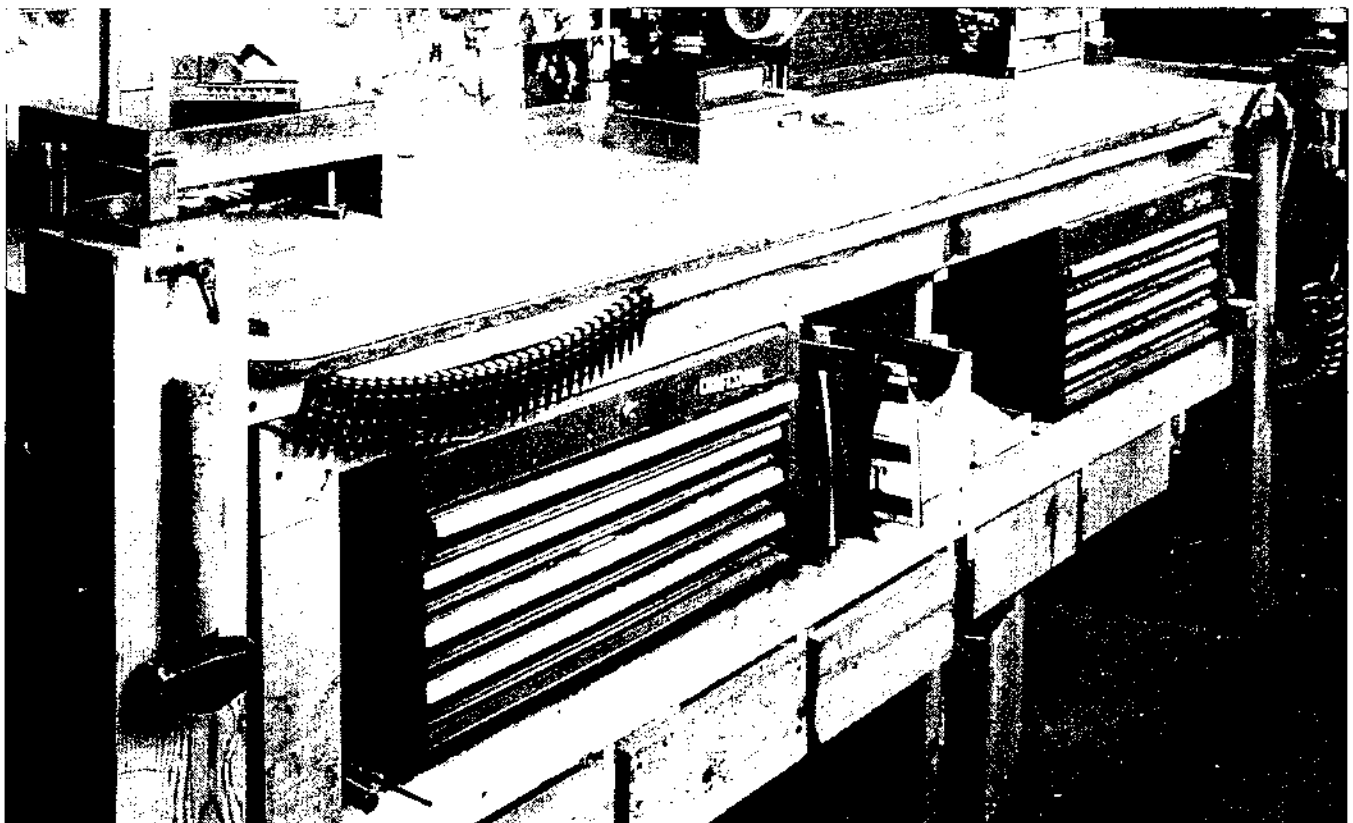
Craftsman tool drawers, tucked under the workbench, help keep small parts and finished knives close at hand.
